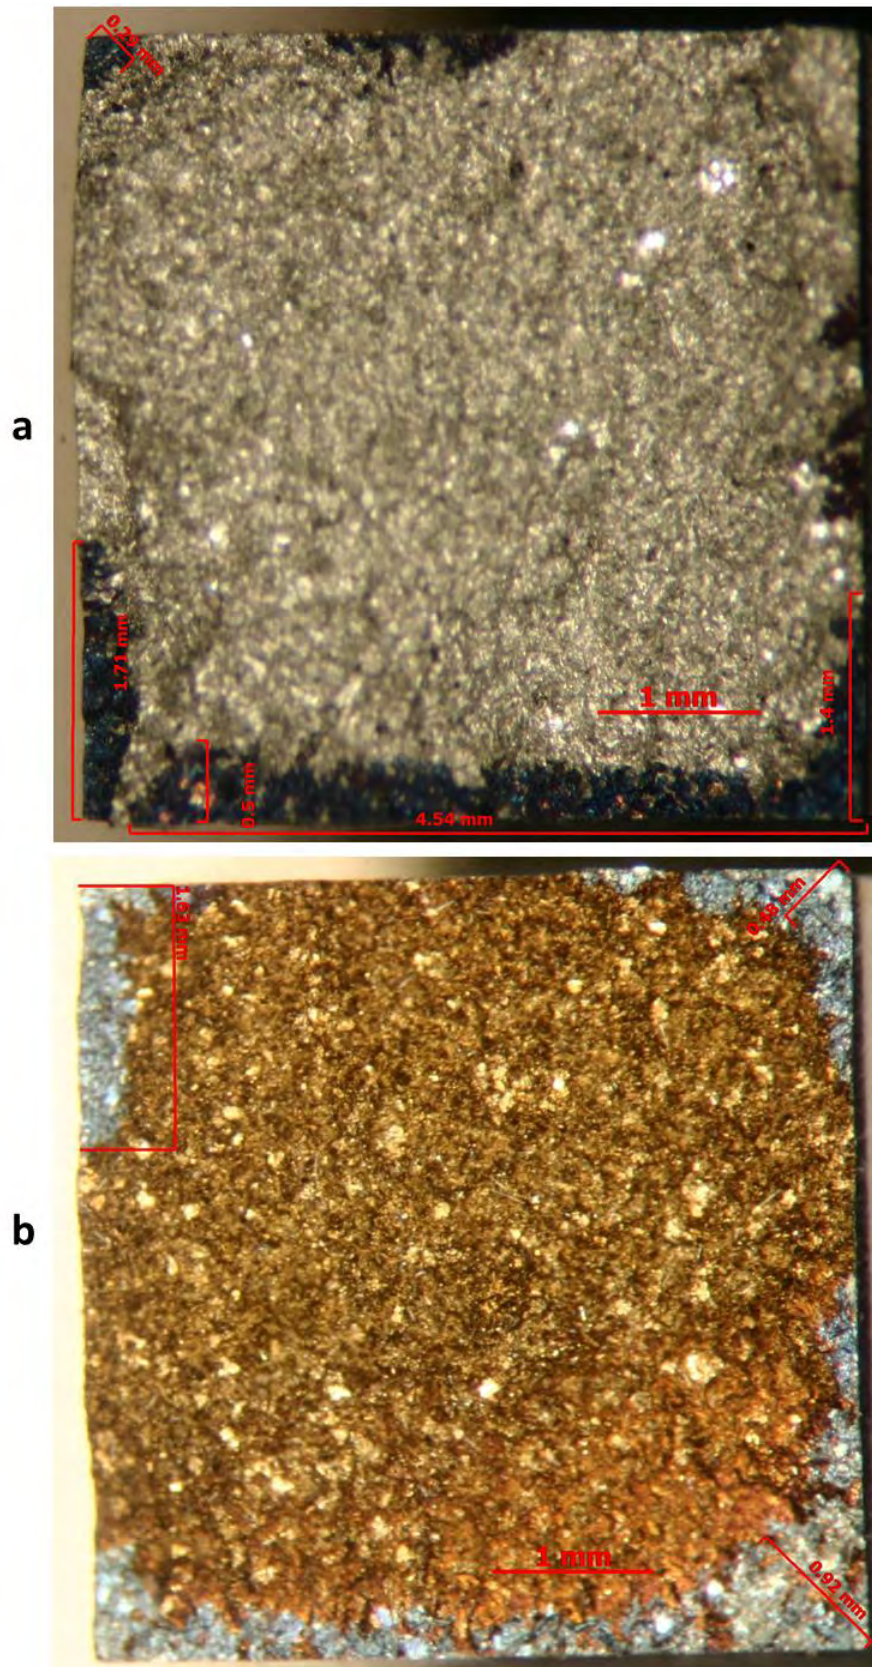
Surface cracks found in specimens after heat tinting: (a) CC706 and (b) CC717
